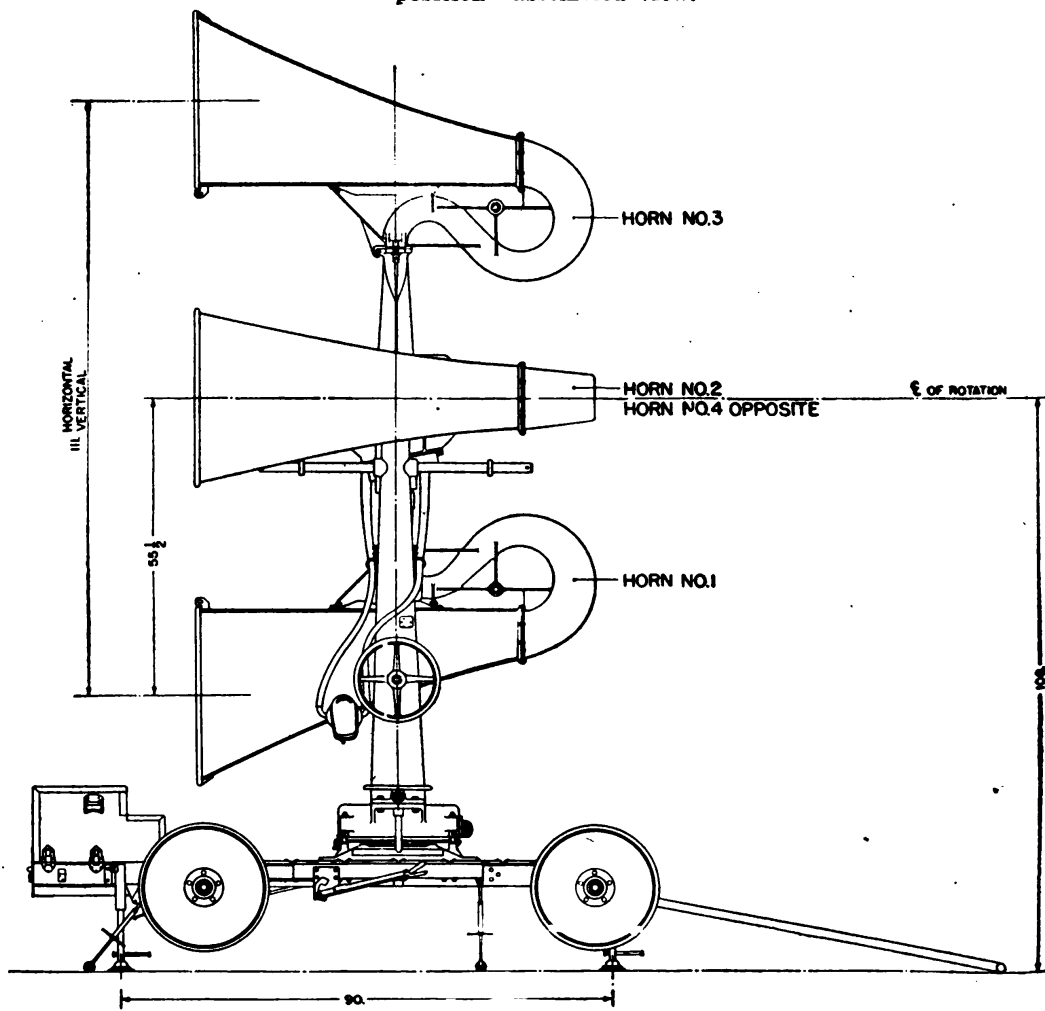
Sound locator, M1A7, complete in traveling position—assembled view.
